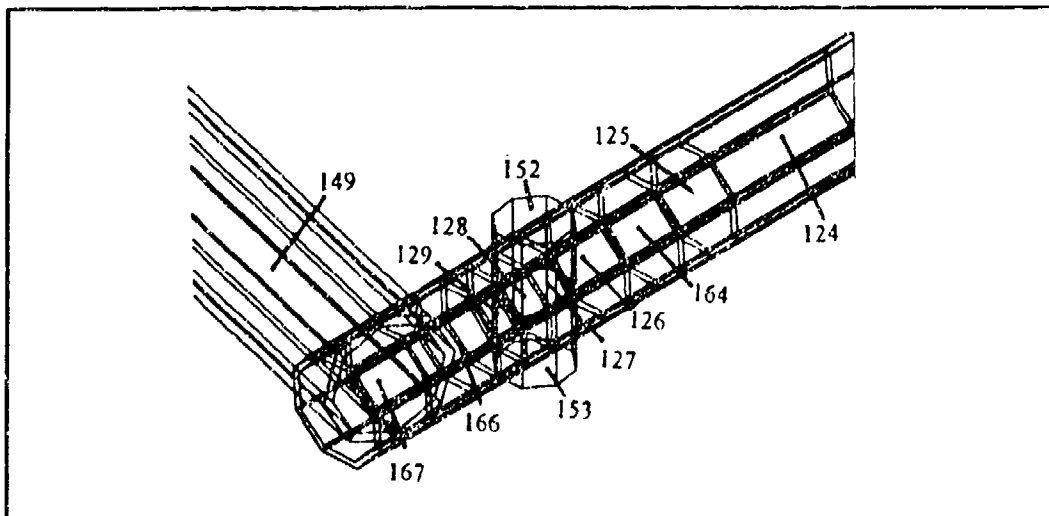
Attachment Point of Right Longitudinal Tube and Torque Tube
